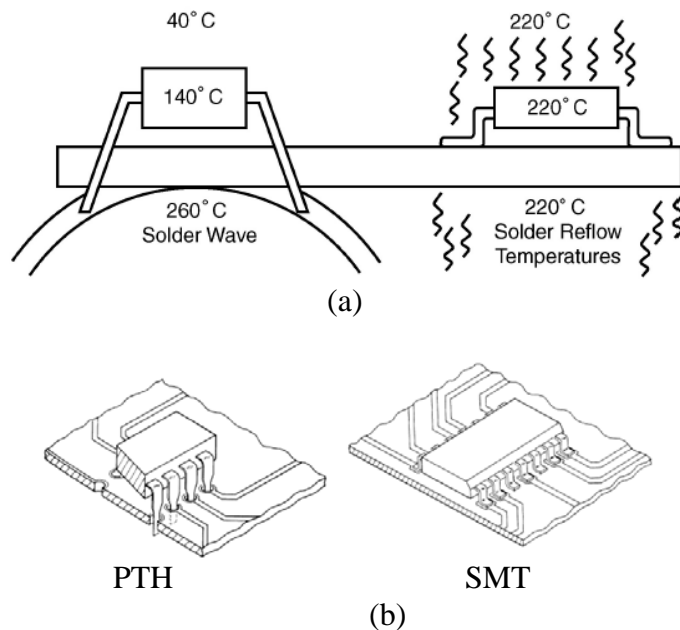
(a) Major assembly line solder process (b) plated-through-hole technology (PTH) and surface-mount technology (SMT) [source: Suhling 2007]
